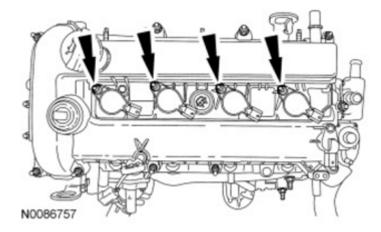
Locating Coil-On-Plugs Stud Bolts Courtesy of FORD MOTOR CO.
